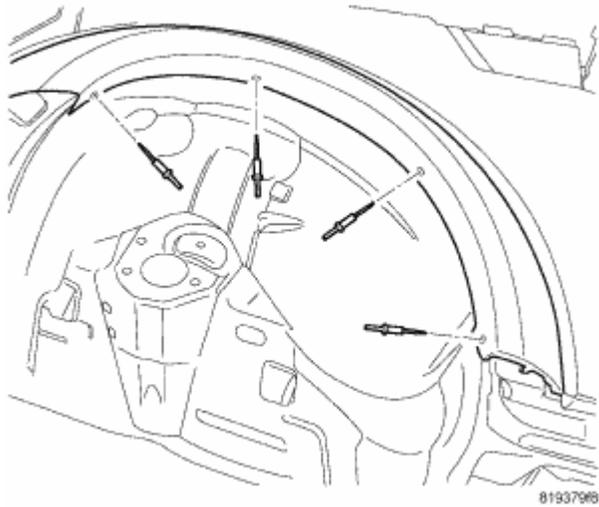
Removing/Installing Rivets Connecting Fender Flare To Wheel House Liner
